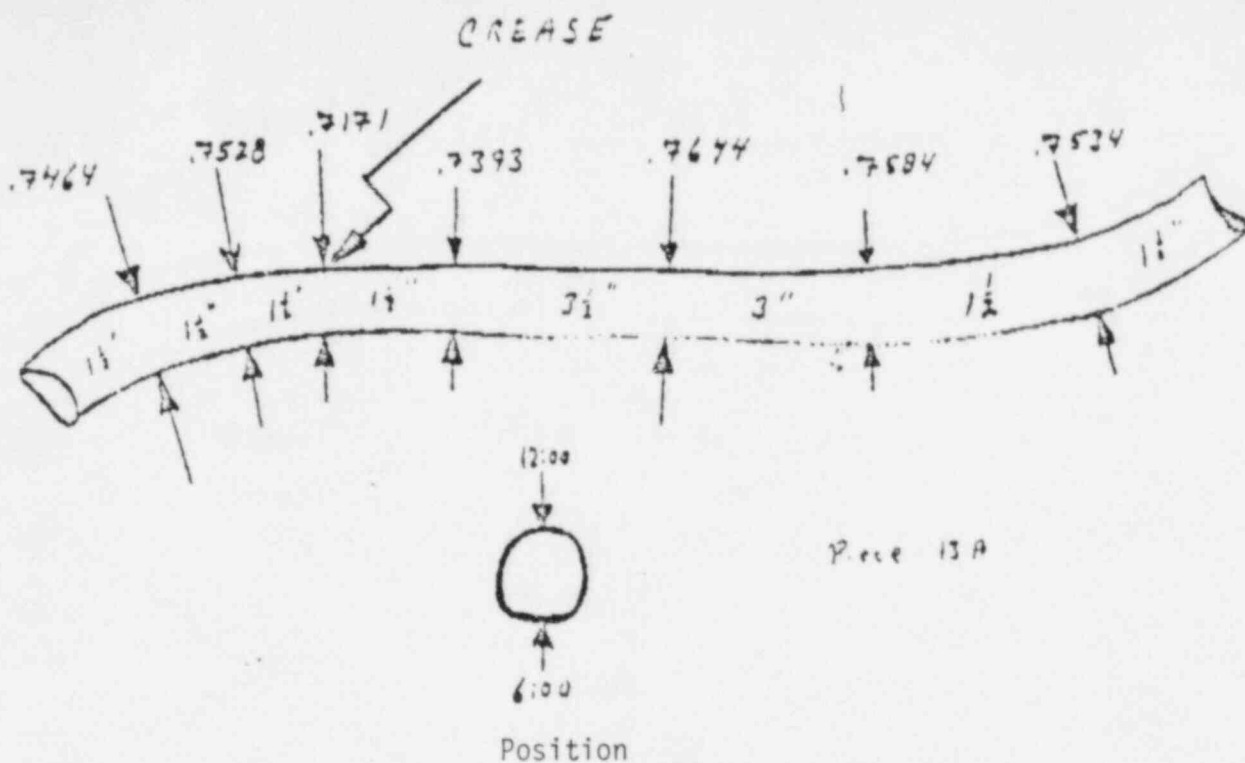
Dimensional Measurements of Tube L29R86, Section 13A
